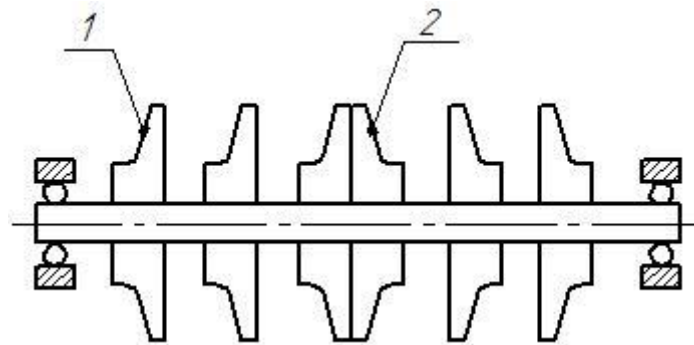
double-suction hydraulic scheme. 1 - impeller; 2 - double inlet impeller.
